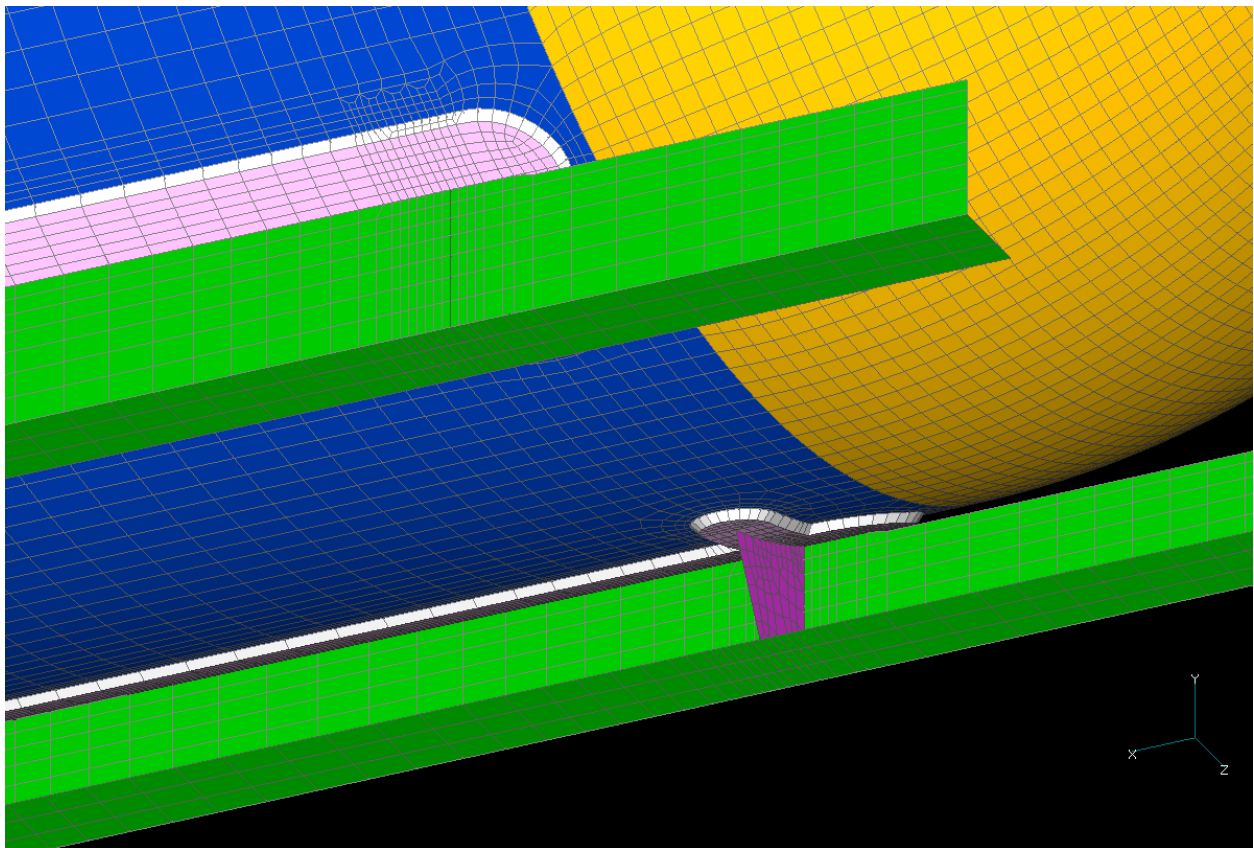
Finite element model of the tank showing pads that attach the tank to the tank rails, pad-to-tank welds and one of the six pad-to-tank rail gussets.
